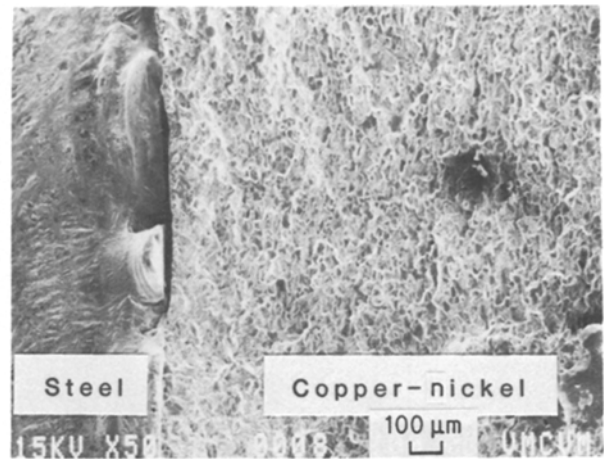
Steel failure adjacent to the MIG weld.
